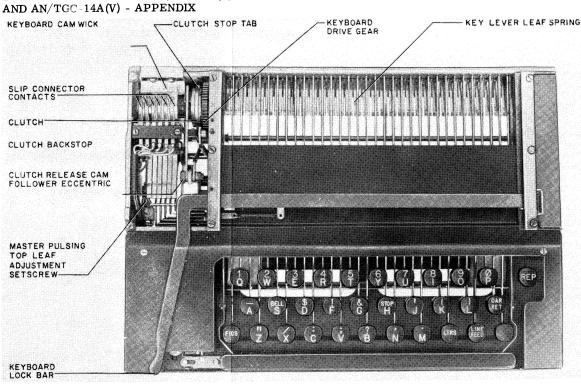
Keyboard Assembly, Top View (TT-318A/UG)
